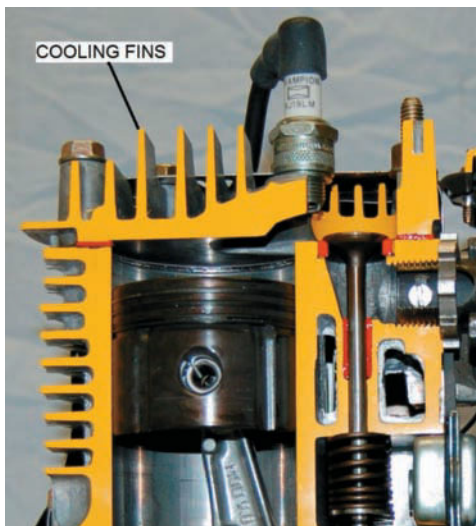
This cutaway photo shows the cooling fins found on a typical small power equipment engine.
